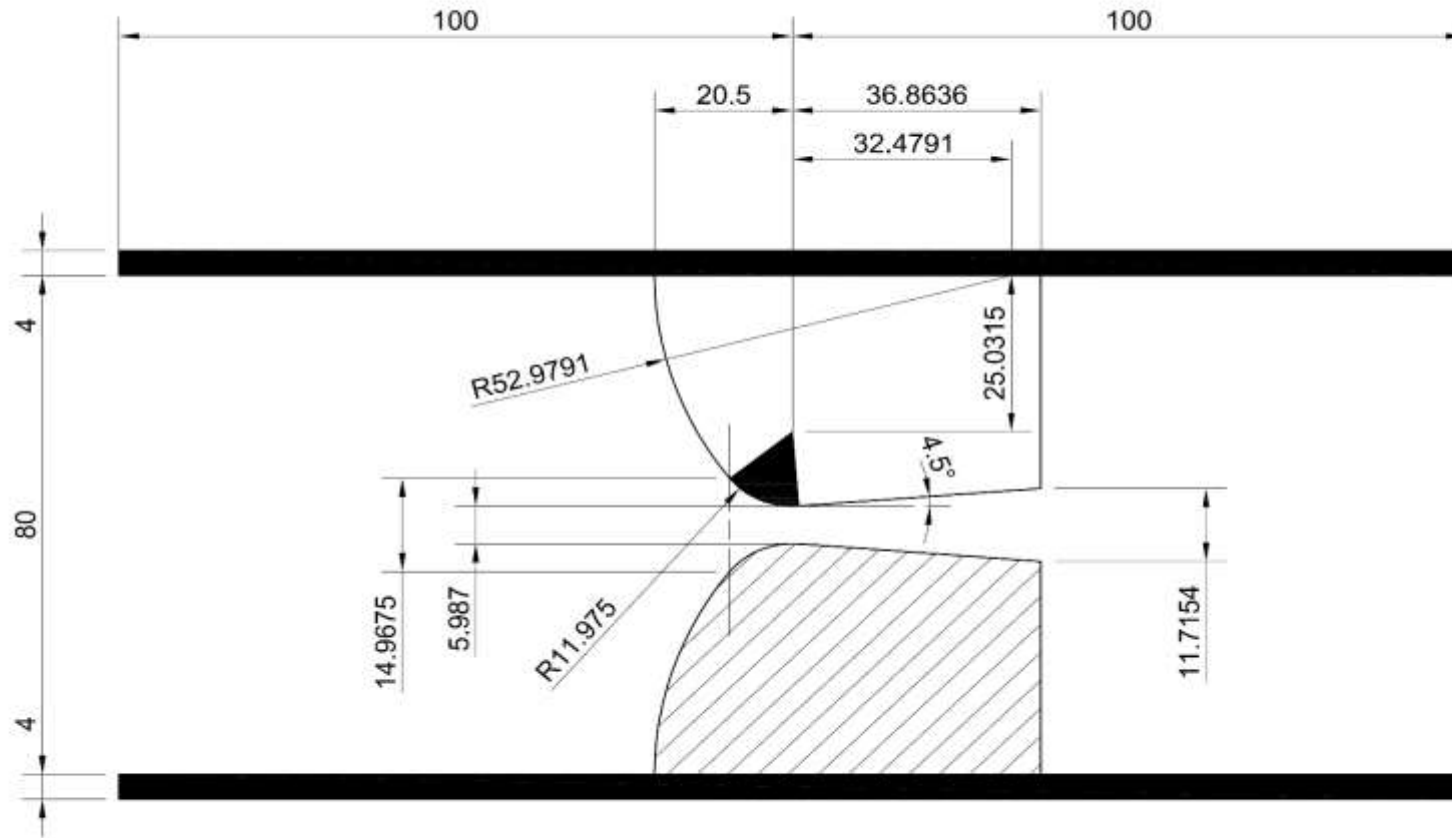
Design drawing of sonic nozzle for metering an air flow rate of 0.04 kg/s
